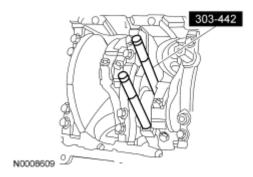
Identifying Special Tool (303-442) Courtesy of FORD MOTOR CO.
